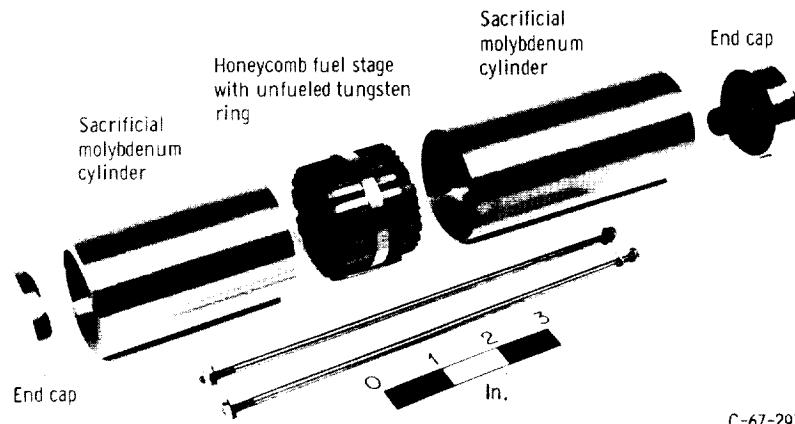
Components for fuel-stage circumferential-ring metallurgical attachment.
